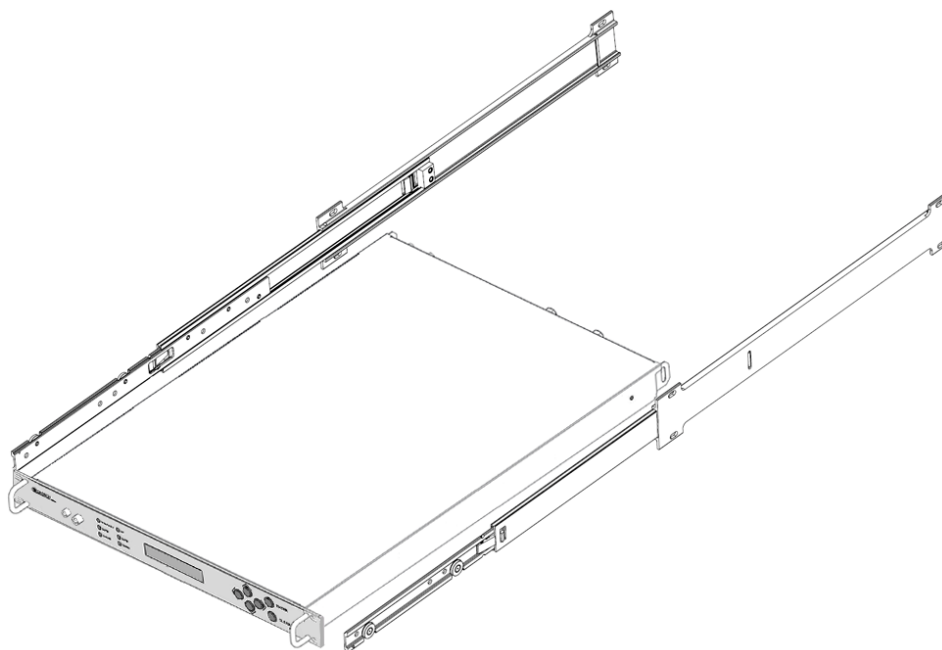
Optional Bearingless Rack Slide Installation (FP/SL000X)
